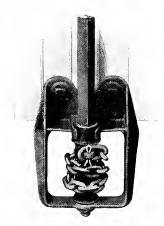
Malleable Iron Step and Sleeve for Square Brake Shaft.
